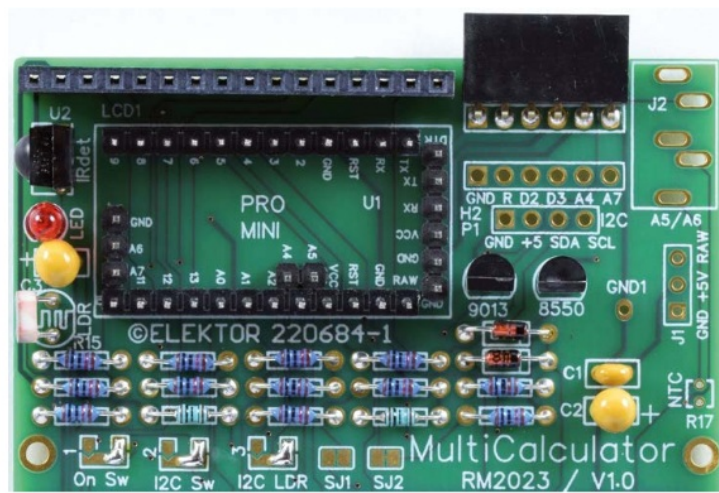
16-way socket for the LCD soldered. Five pinheaders for the Pro Mini placed (not soldered yet).
